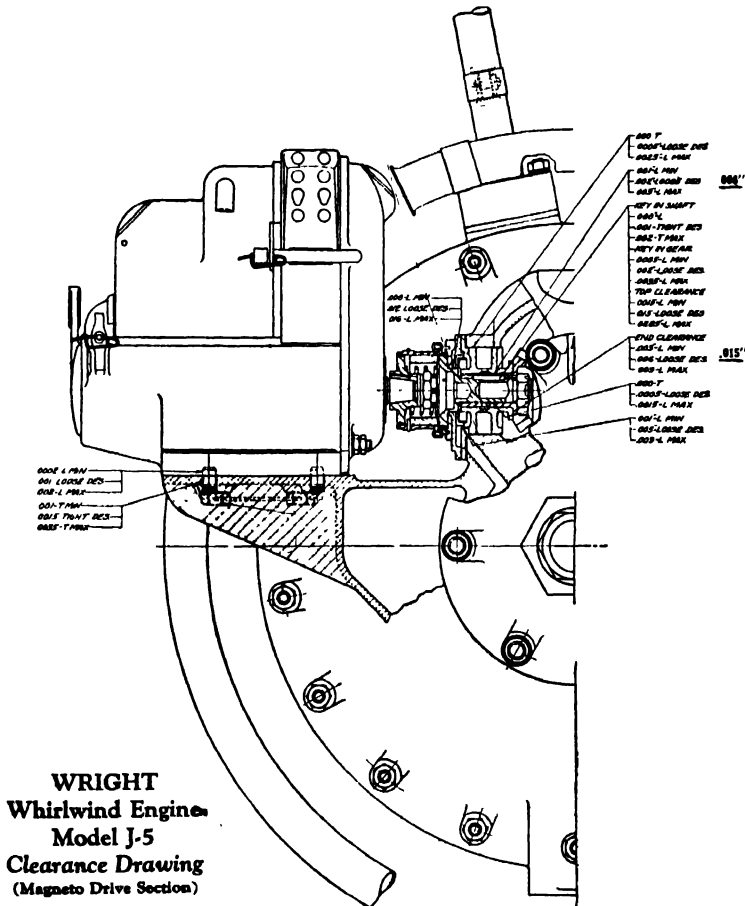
Magneto Drive Section of Model J5 Engine Showing Clearances.
